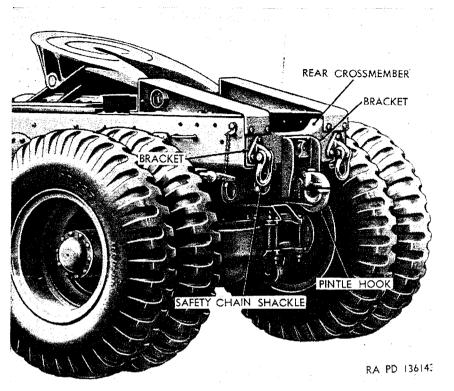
Pintle hook and safety chain shackle mounted on rear of tractor truck M52.
